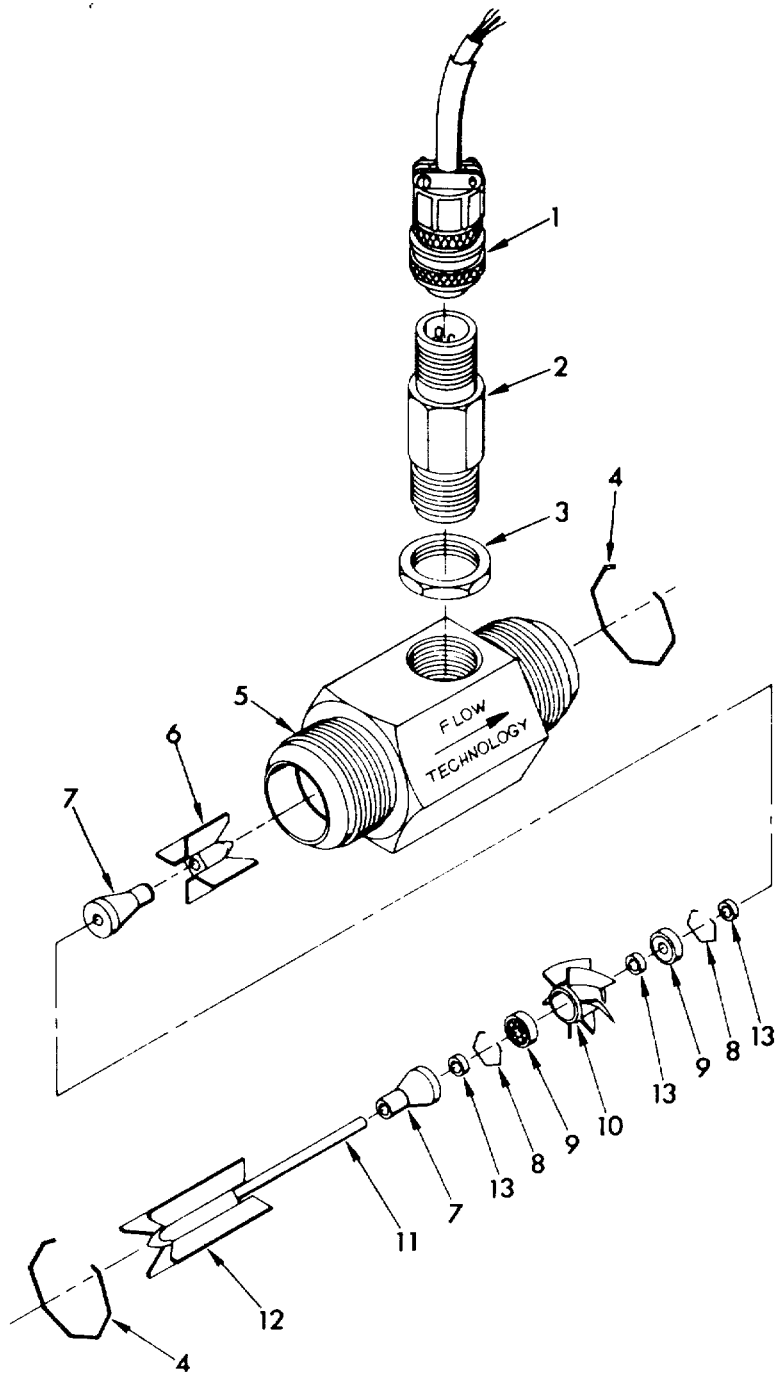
COMPLETE DISASSEMBLY 1" FLOW TRANSDUCER.
